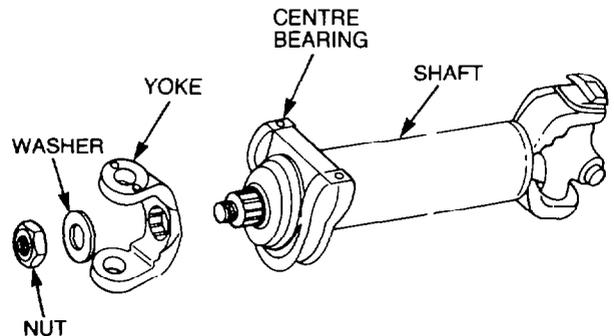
Transmission Propeller Shaft and Centre Bearing
